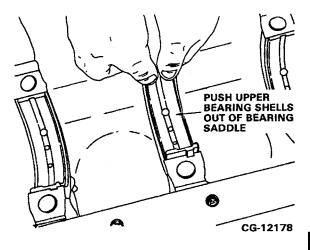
Remove Upper Bearing Shells CLEANING
